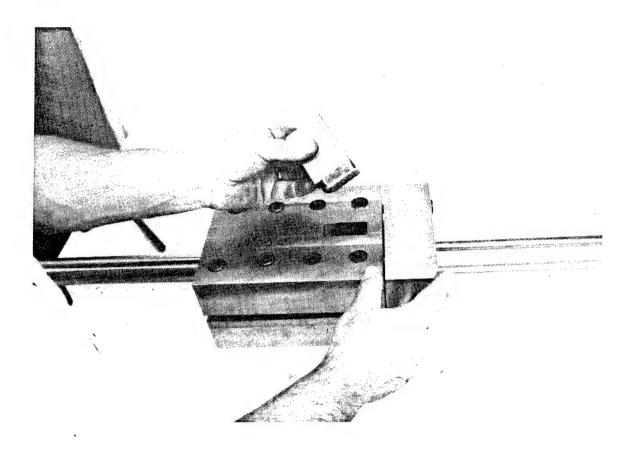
Inspecting Fit-up of Punch-to-die Cavity for Pin-end Shaping
